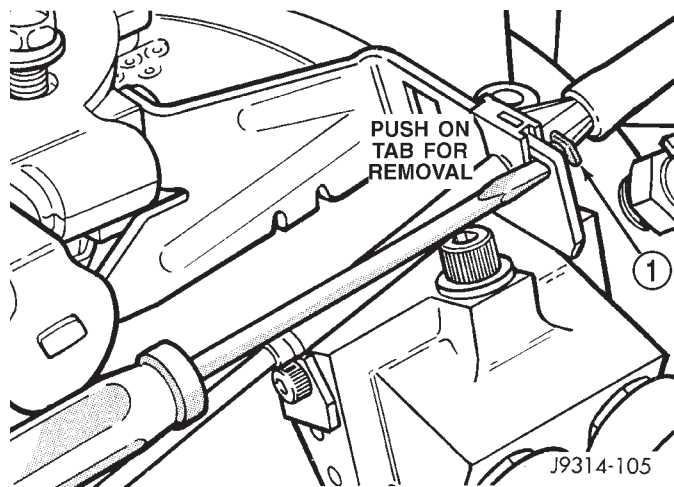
Cable Release Tab—Typical V-6/V8 Engine
